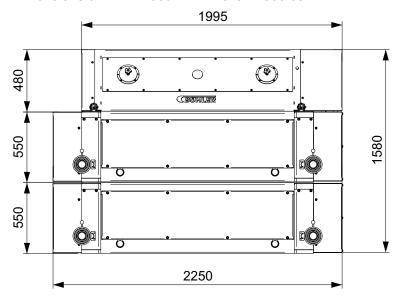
Dimensions of DFZL-1500 with 1 roller module
